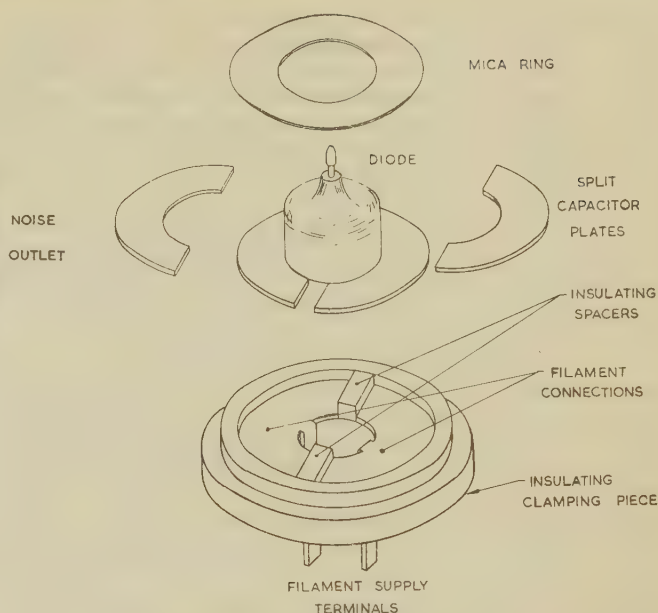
Exploded view of diode and blocking capacitor assembly.
